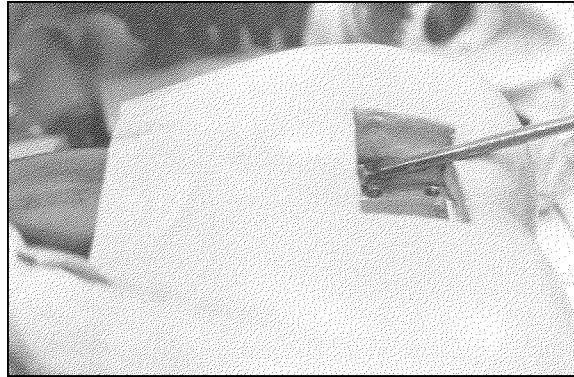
Removal procedure for rear screws holding lumbar adaptor
